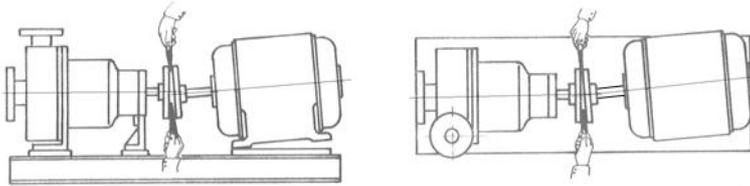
Angular: the maximum misalignment allowed is 0.8 mm (for a joint that has a 96 millimetre diameter).
